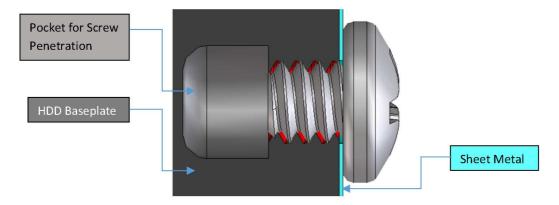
Side mount hole, 6-32UNC x 1/8" (3.8 threads engagement)
